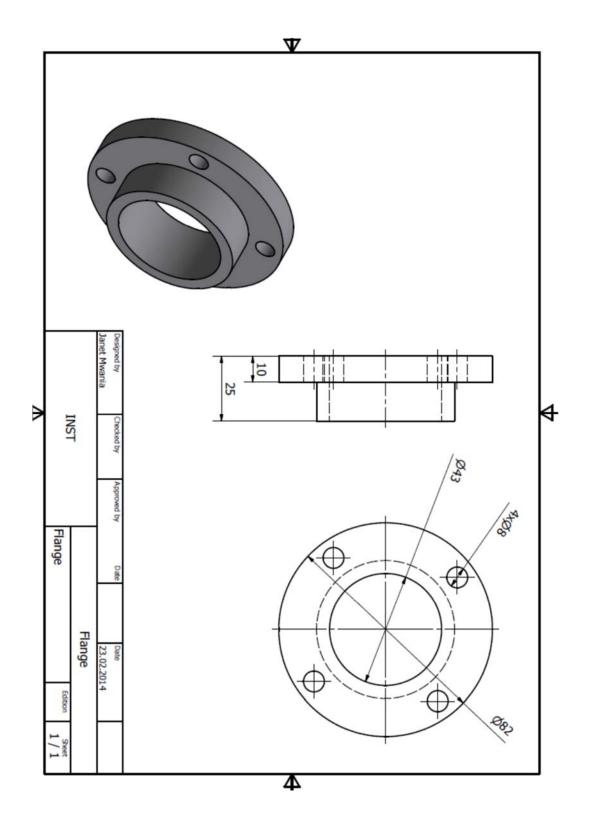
The Barrel's rear Flange in 3D with End and Front Elevations detailing dimensions (mm)
